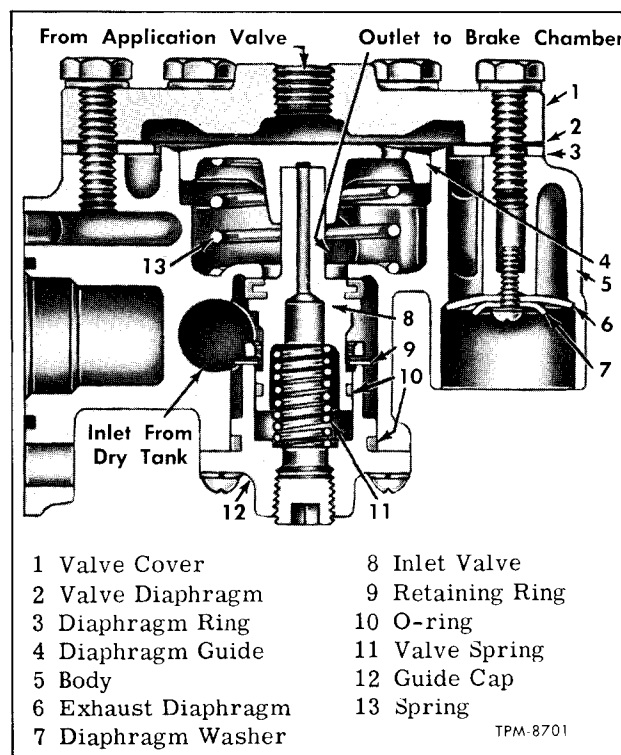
Rear Brake Relay Valve (Bendix-Westinghouse)
